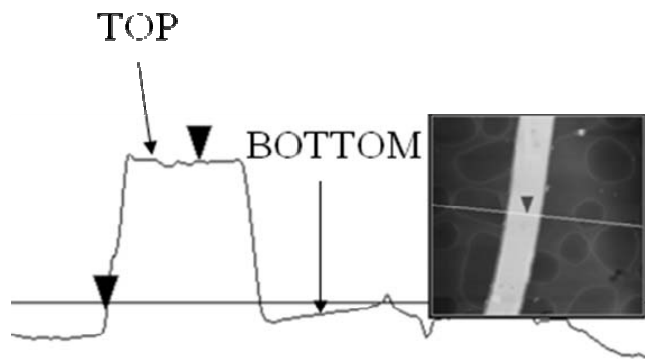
Notation of Top and Bottom surfaces in molded polymer parts.
